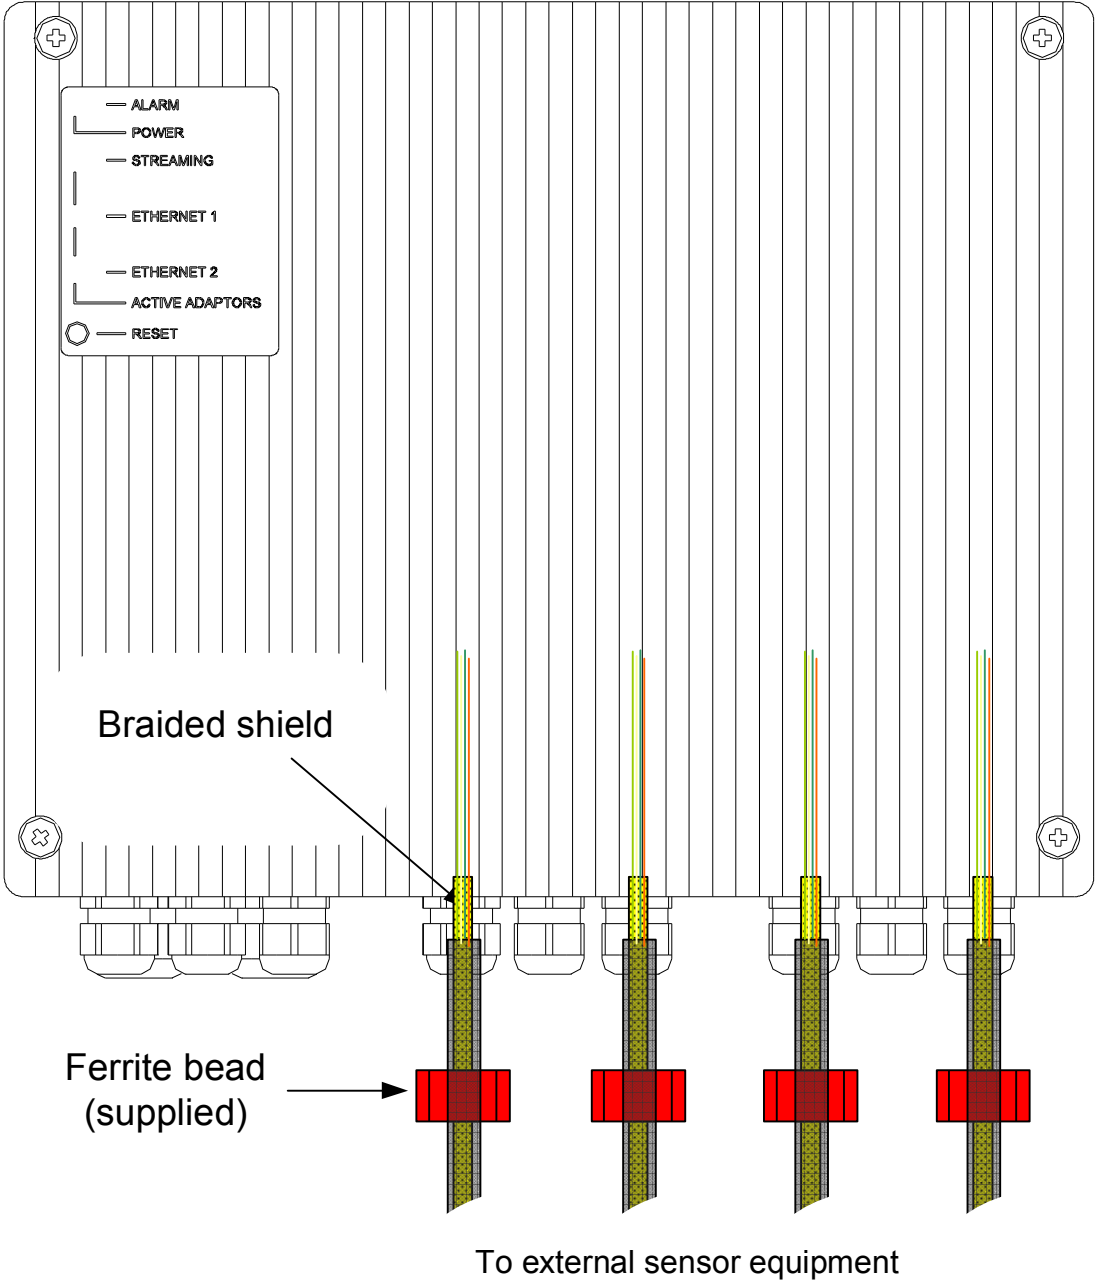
WIM with external cabling to external equipment (or sensors) and ferrite bead
